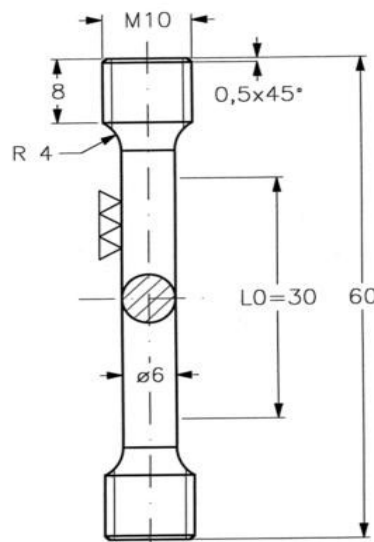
b. ST specimens-DIN50125-B 6x30, specimen diameter 6 mm and gauge length is 30 mm.
